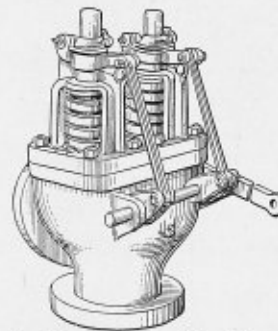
"Duplex" Safety Valve Consisting of Two Valves Mounted on the Same Body Casing
